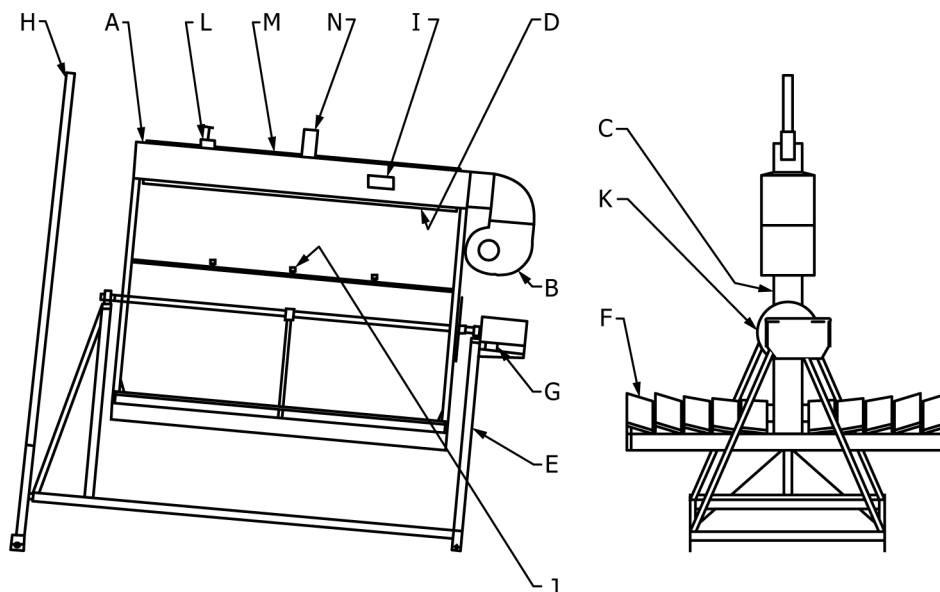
Schematic of Linear Fresnel Reflector Concentrator Accelerated Weathering Machine Single Axis Tracking
